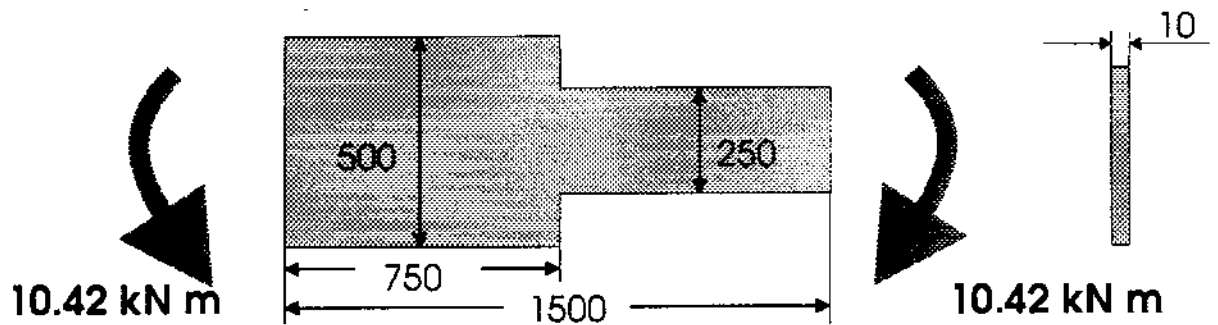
Geometry and Dimensions for Plate *without* Shoulder Fillet
